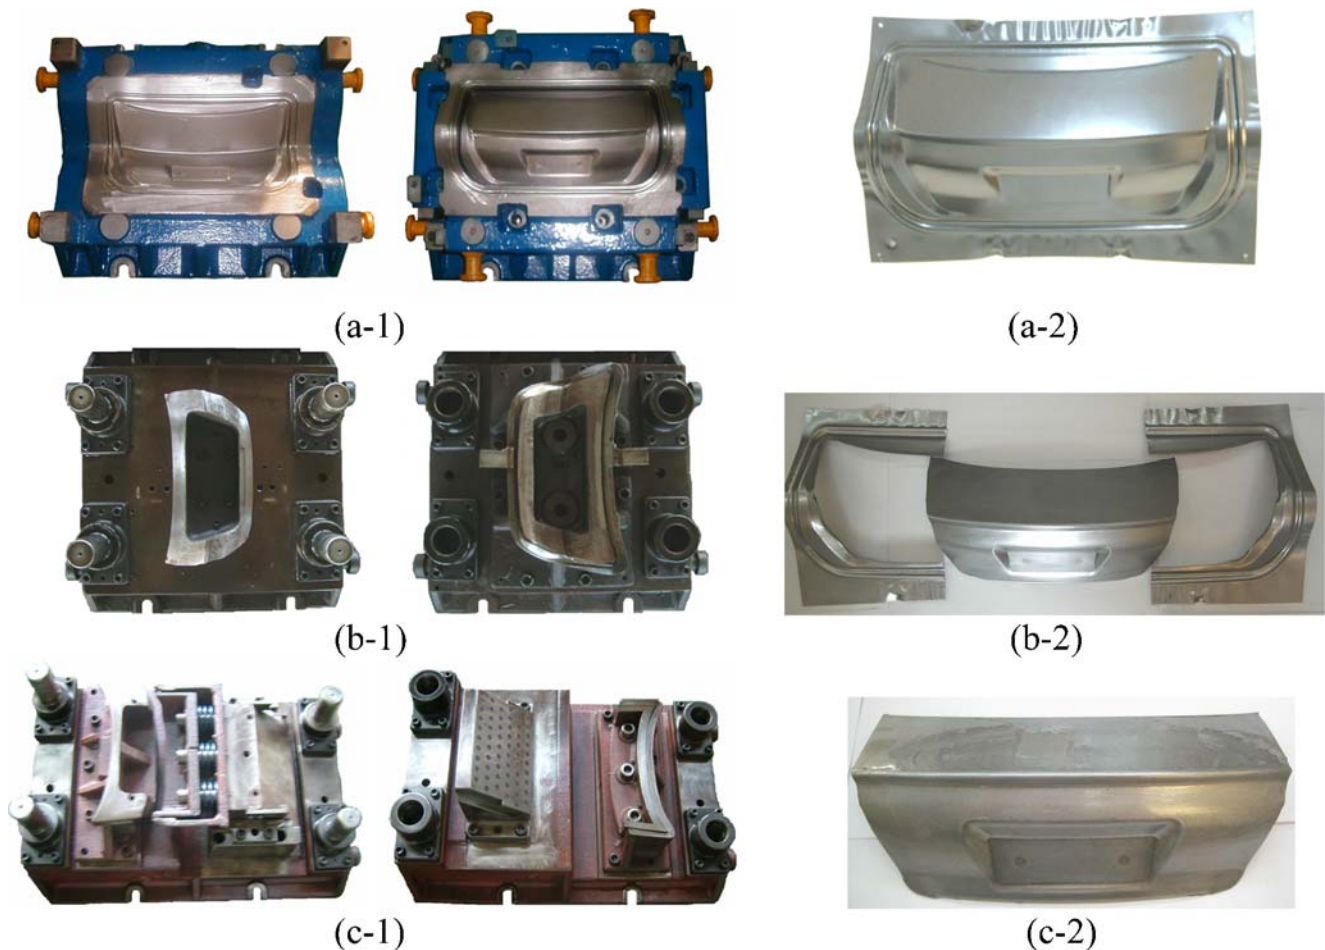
Stamping dies and sample parts. a1 Drawing die. a2 Drawing sample. b1 Trimming die. b2 Trimming sample. c1 Flanging die. c2 Flanging sample
